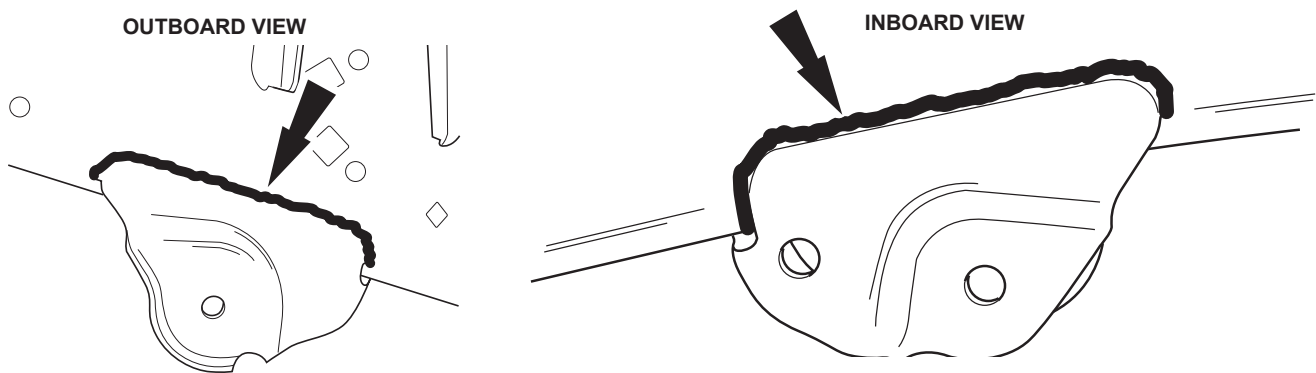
VIEW OF REAR SPRING FRONT HANGER BRACKET SHOWING WELD LOCATIONS. RH SHOWN, LH SYMMETRICALLY OPPOSITE
